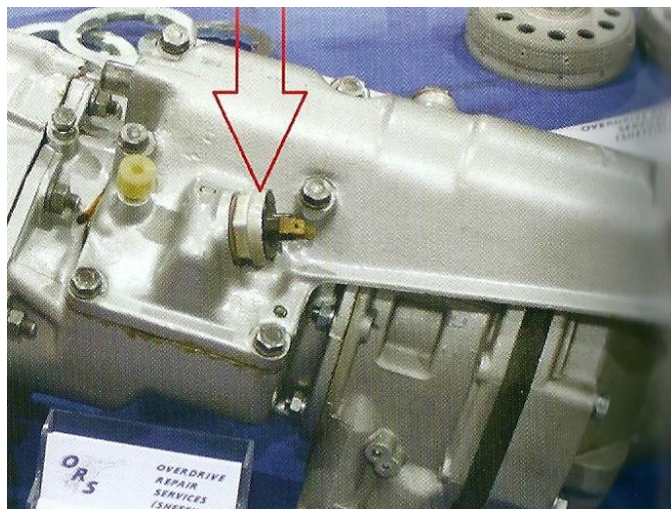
General view of gearbox showing overdrive inhibitor switch (arrowed).
